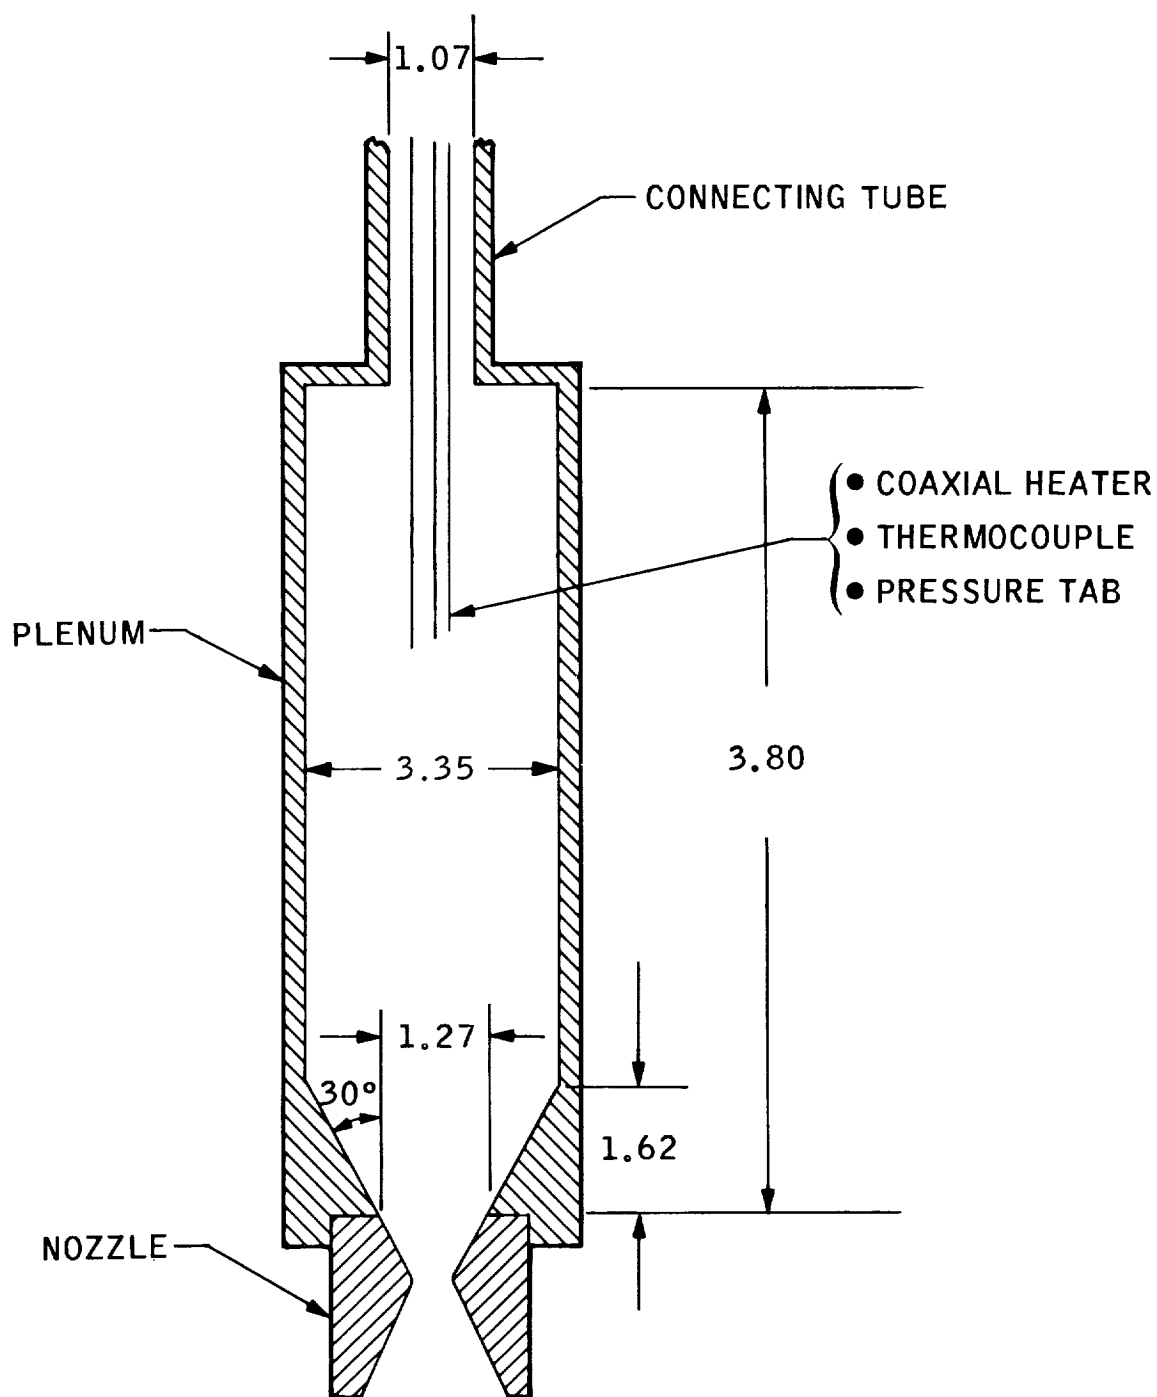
Nozzle-plenum assembly installed in the Molsink
